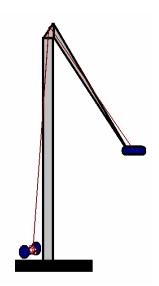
Side view of the crane proposed as design #3. The crank used to control cable tension and thus raise the pushing shaft towards the intended button is at the base of the longer rod.
